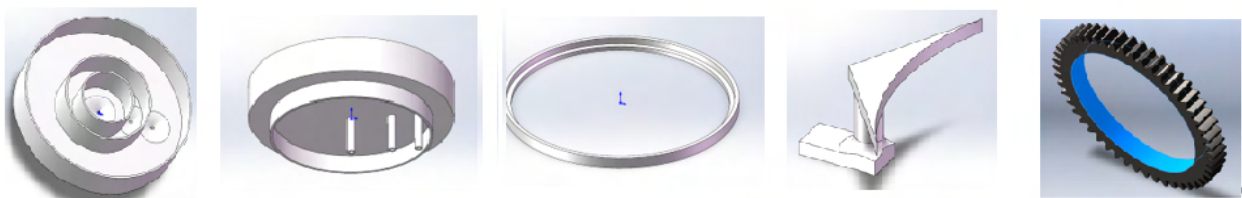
Brewing Nozzle (top & bottom view), Nozzle Holder, Holder Support, Spur Gear Ring
